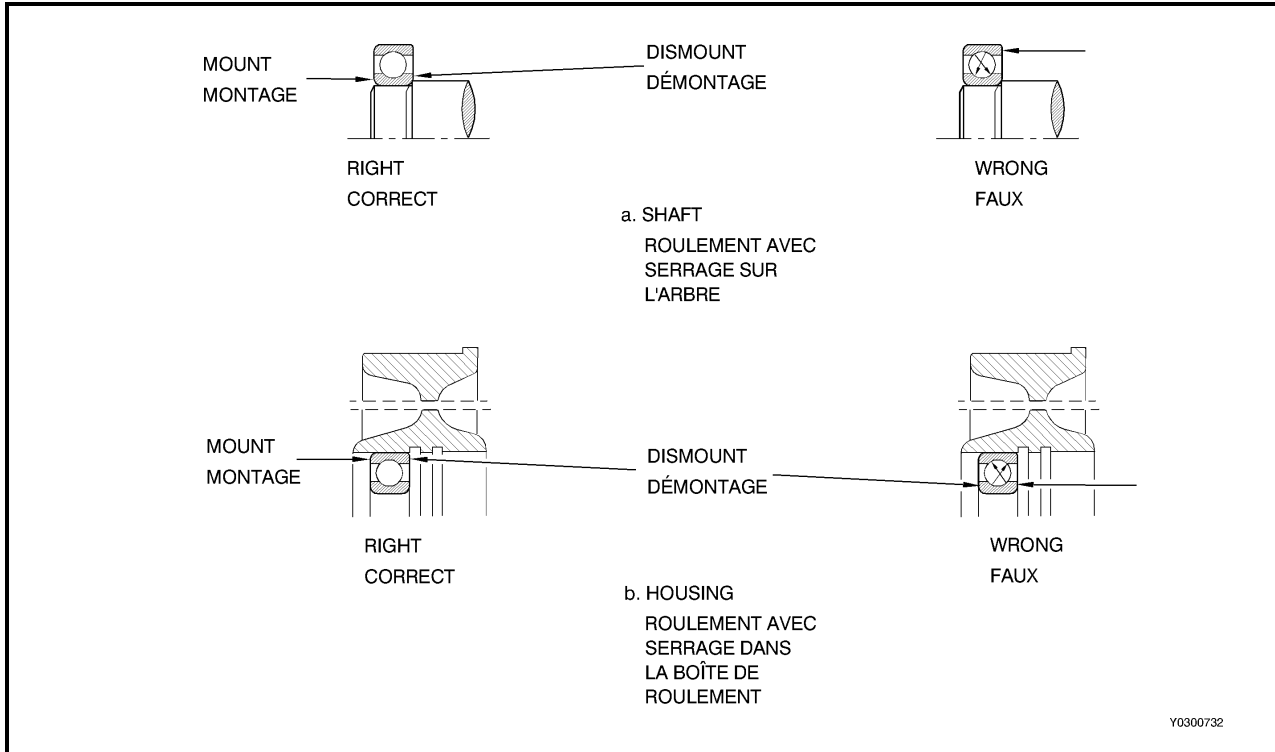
Application of Mounting and Dismounting Forces to Tightly Fitted Bearing Rings
